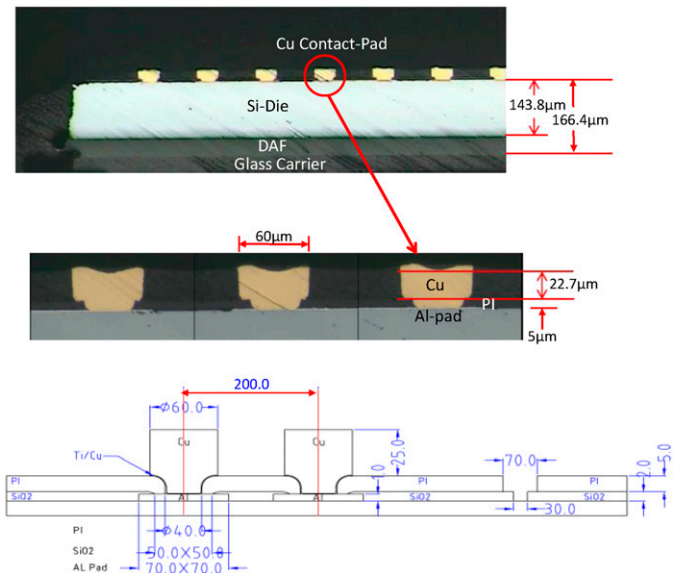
Cross-sectional view of test chip (PI = 5 μm).
